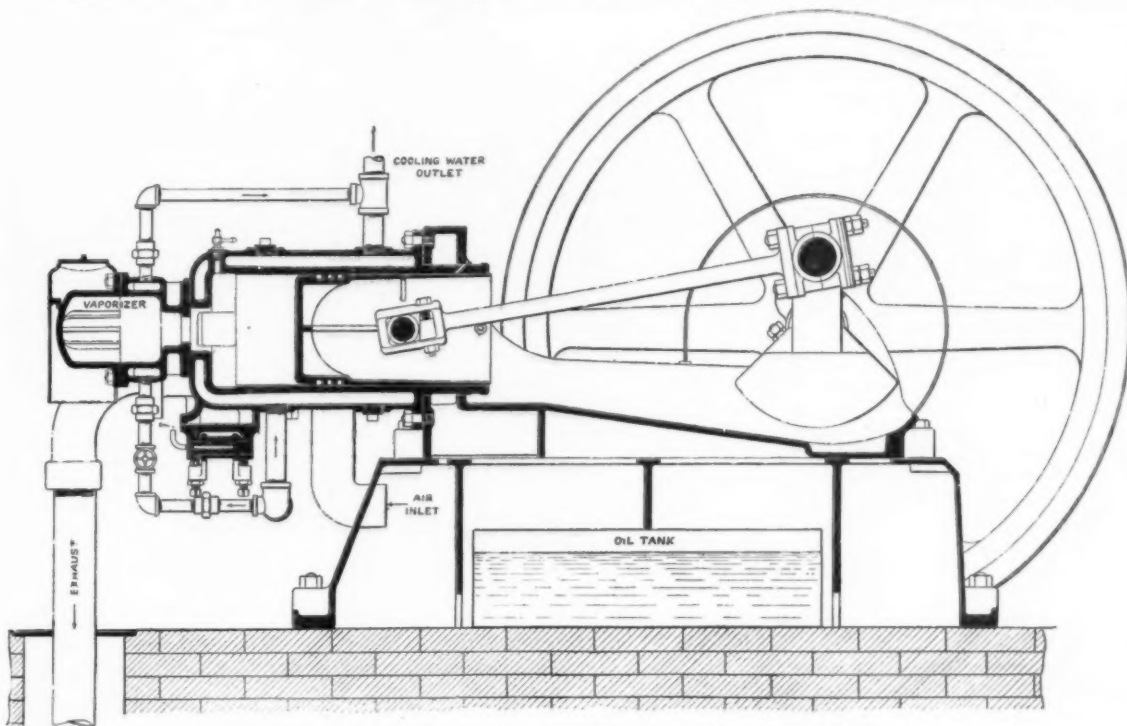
VERTICAL SECTION OF HORNSBY-AKROYD OIL ENGINE.
